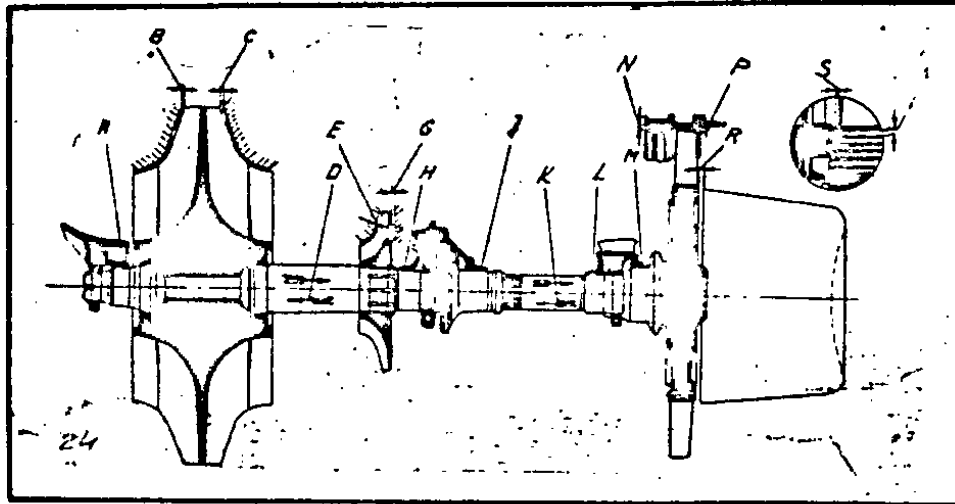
Scheme of Main Assembly Clearances of the Engine.
